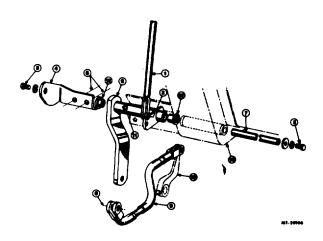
Relay Shaft Details (Vehicles Except 2200 Series) (Typical)
